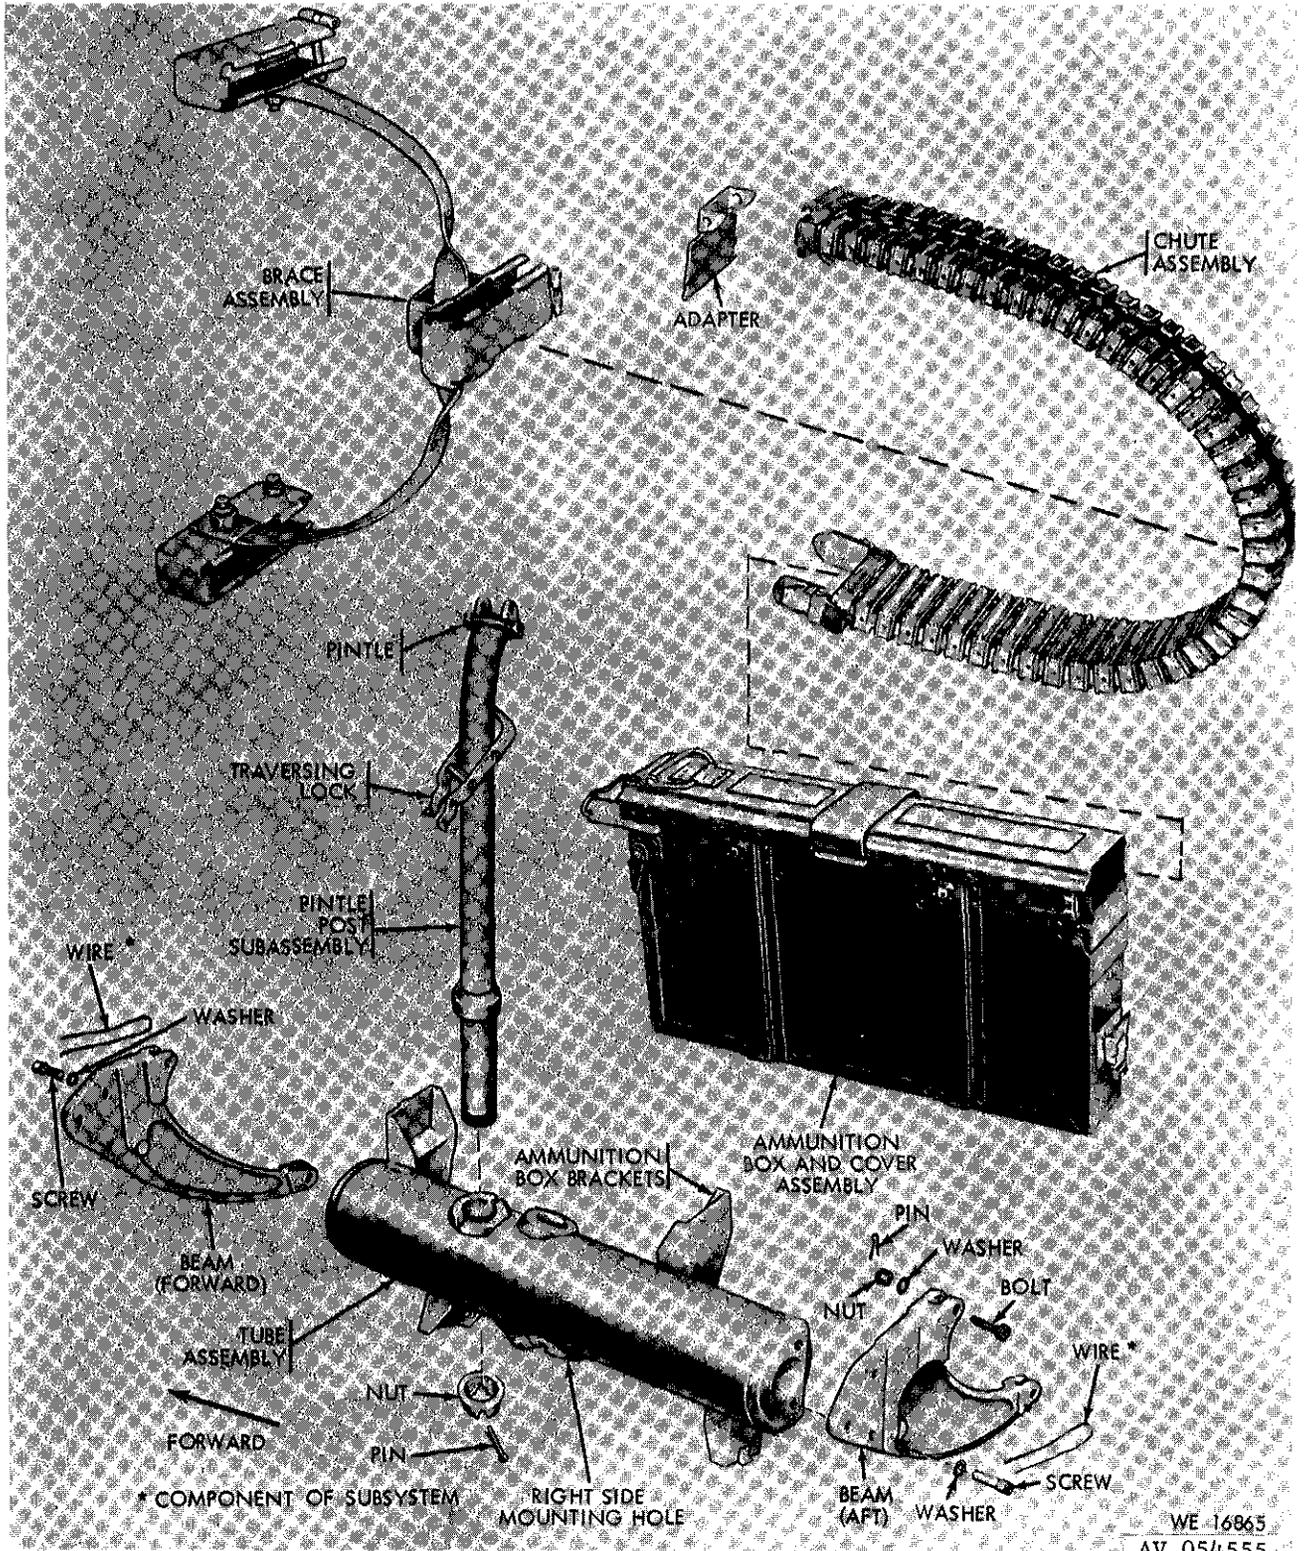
Armament subsystem M23 mount assembly - exploded view
